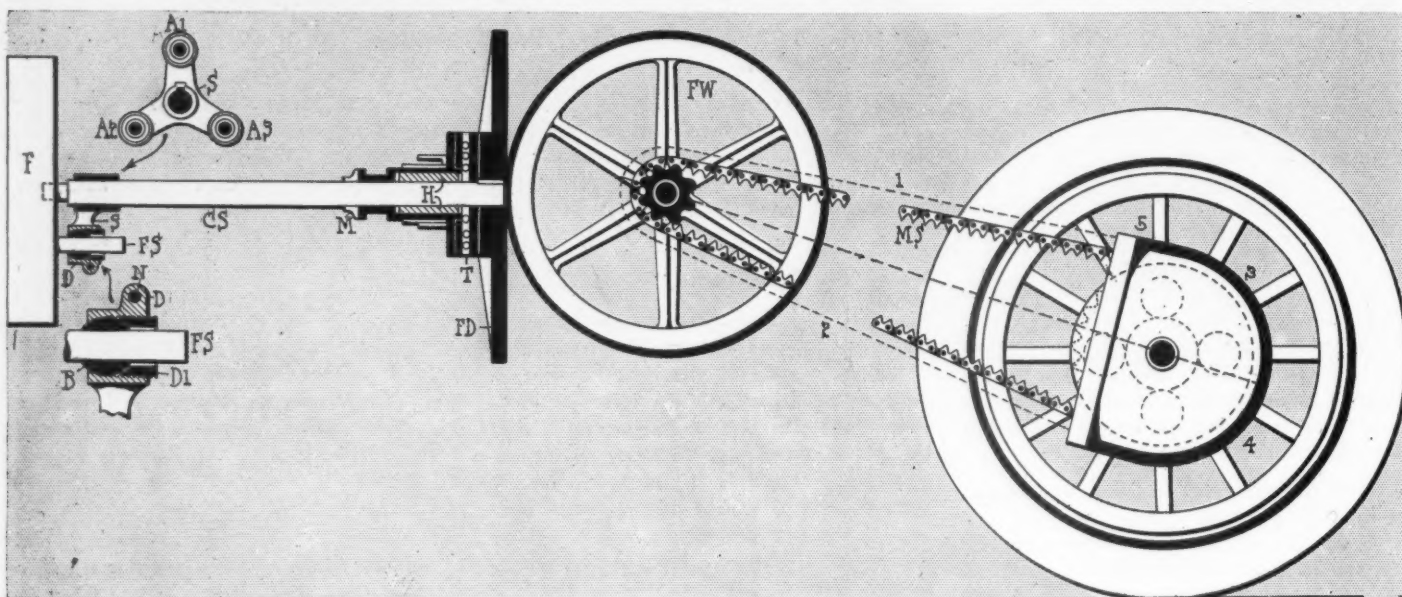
IMPROVED FRICTION TRANSMISSION ON 1909 LAMBERT CARS
